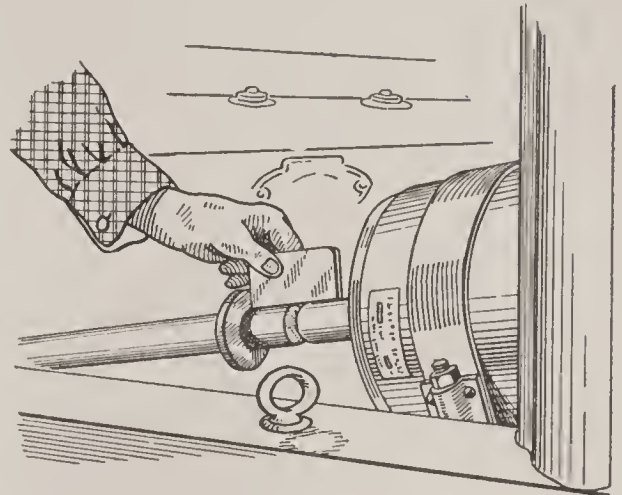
Checking up Alignment of Motor Shaft and Pinion Shaft
